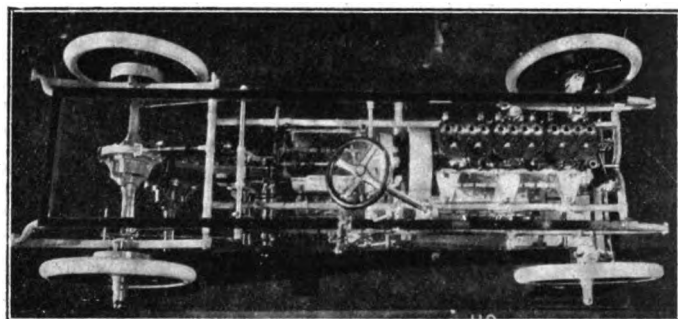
Chassis of Ariel Six-cylinder Car.
